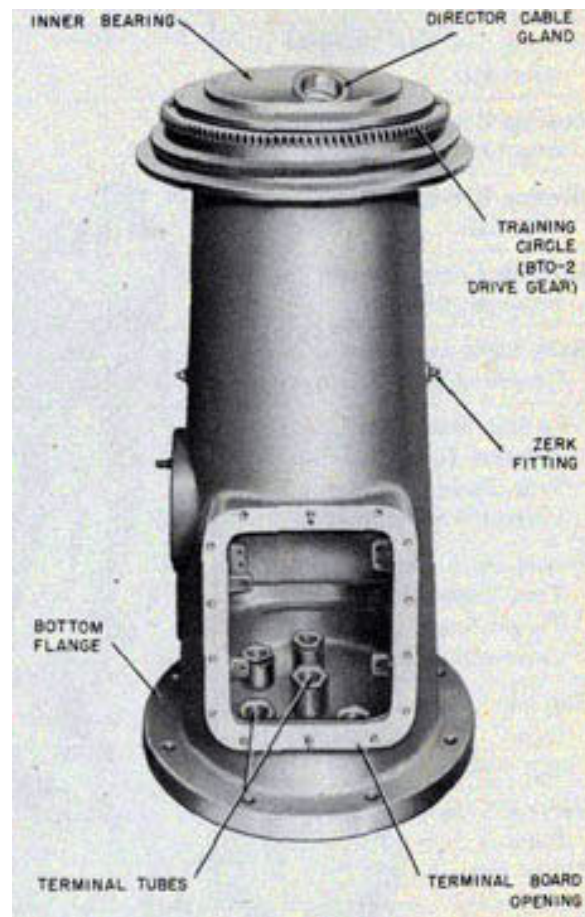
Director stand with terminal board cover removed to show terminal tubes.
